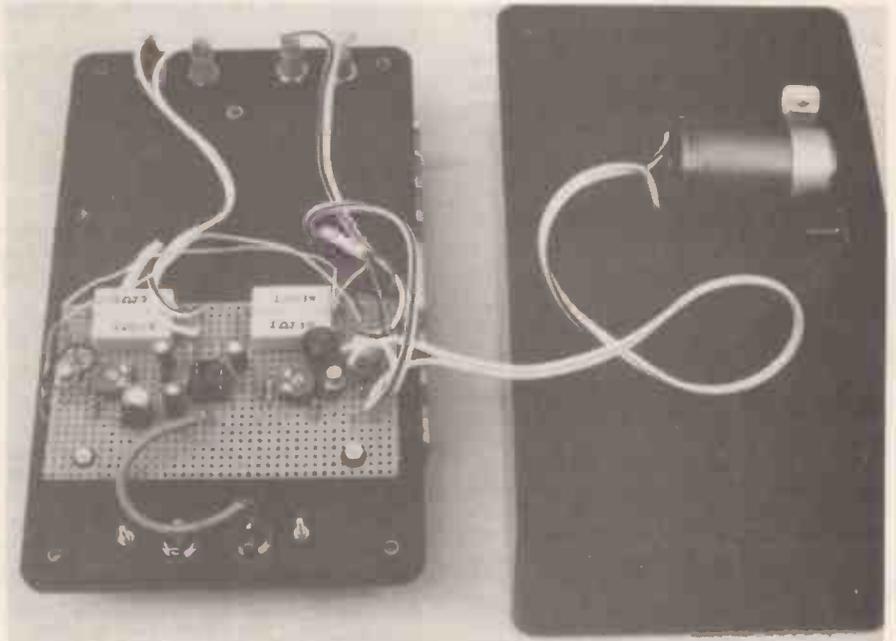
Wiring from the power Darlington and smoothing capacitor C5 to the circuit board. The power transistors are mounted on the underside of the heatsink using insulating kits. If using a metal case it MUST be earthed using a solder tag or socket bolted to a metal surface.
